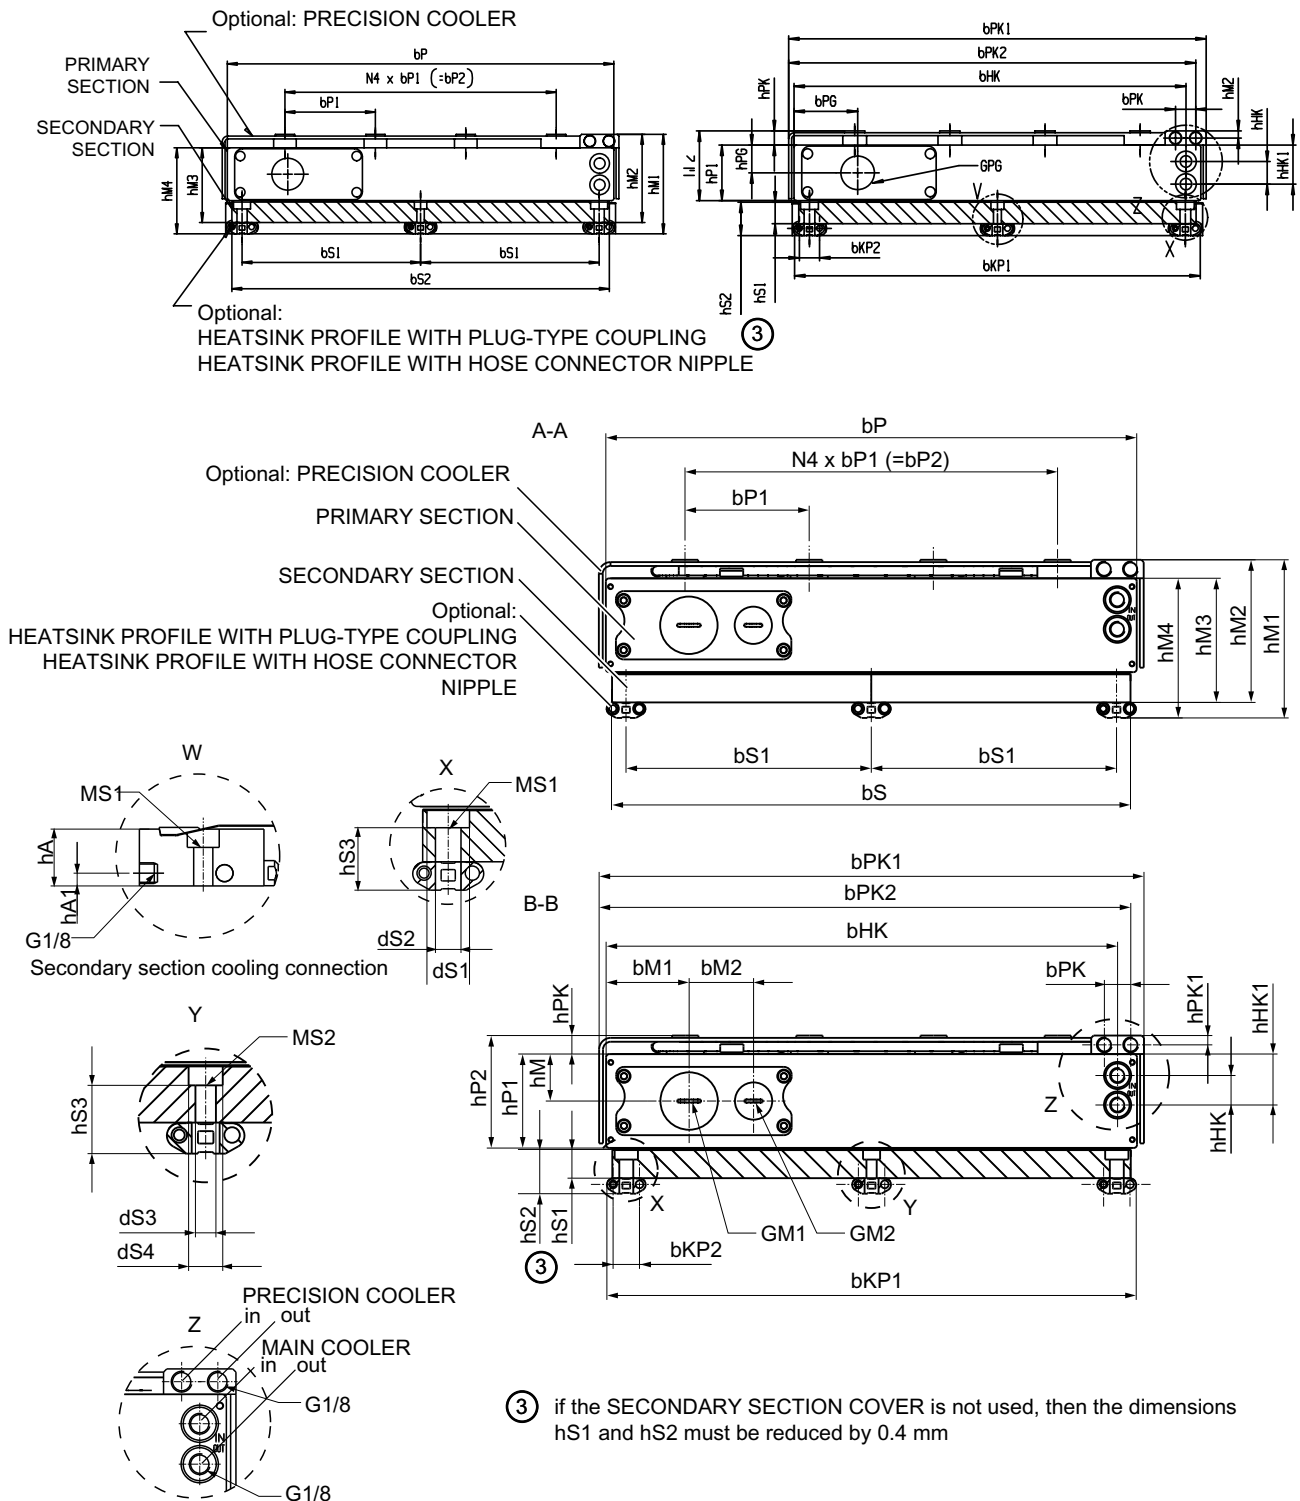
Installation diagram of motor 1FN3900 (cross sections and details)
